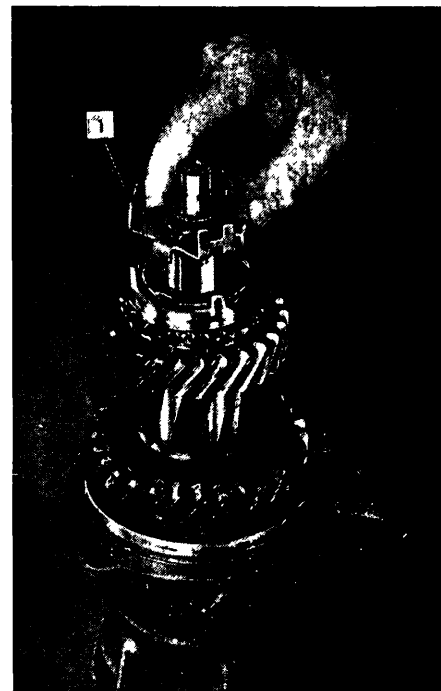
Installing clutch ring driver. 1946-52 Series 40
